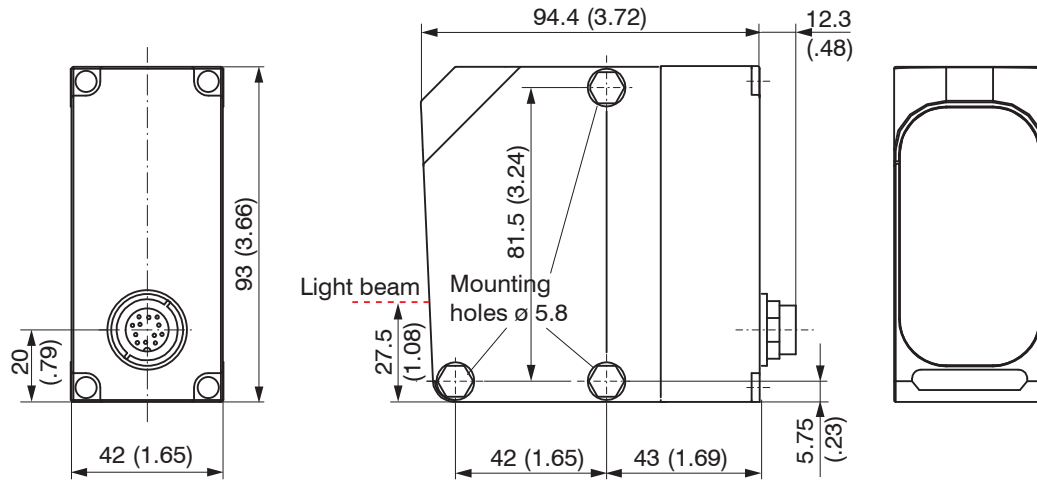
Dimensional drawing sensor, dimensions in mm (inches), not to scale
